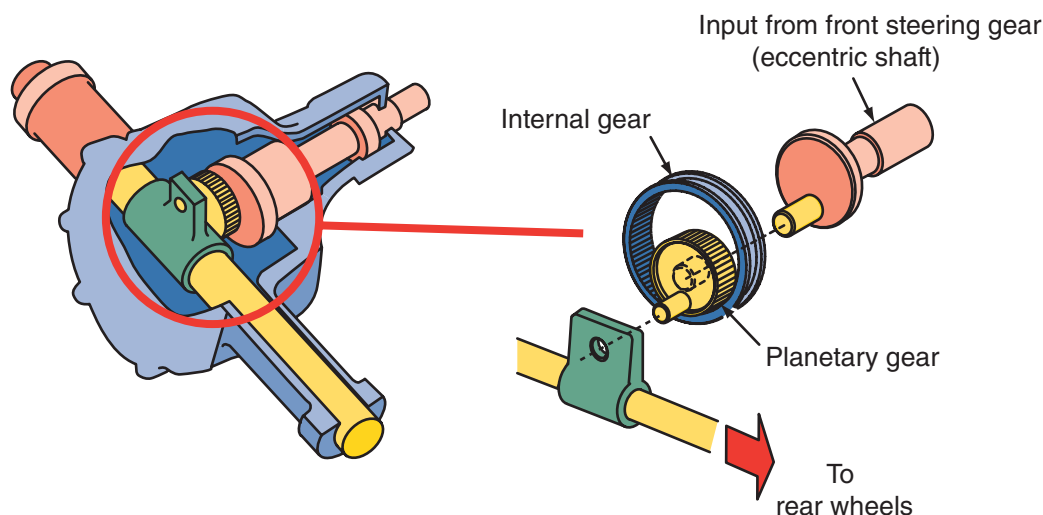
Inside a rear-steering gearbox is a simple planetary gear setup.
